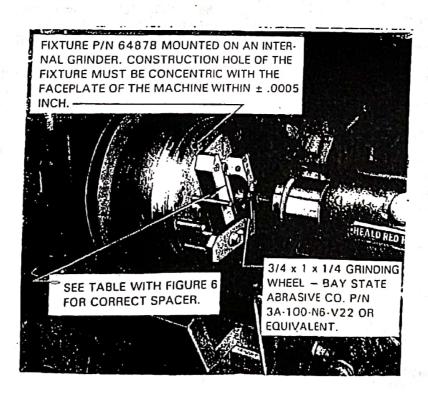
Counterweight and 64878 Fixture Assembled on an Internal Grinding Machine
